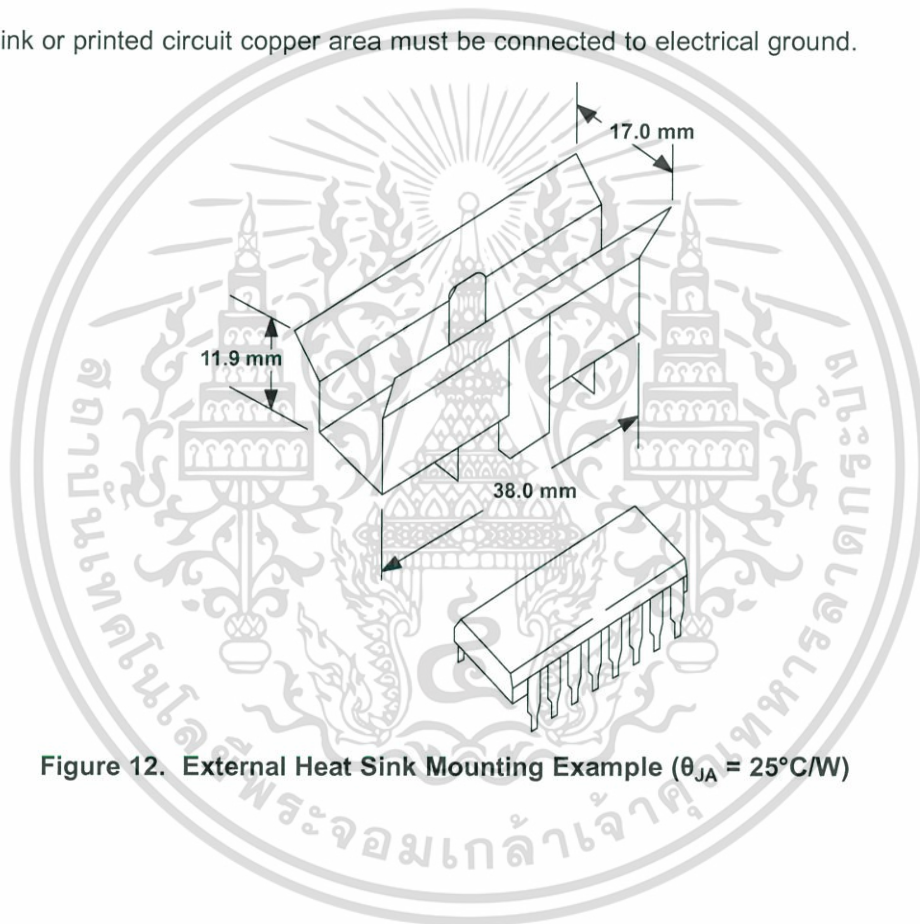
External Heat Sink Mounting Example ( $\theta_{JA} = 25^\circ\text{C/W}$ )
